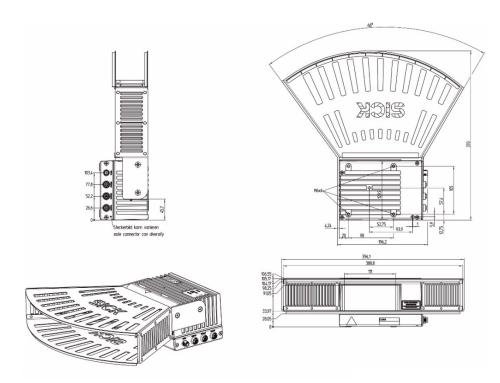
LMS4x21 dimensional drawing with laser protective cover
